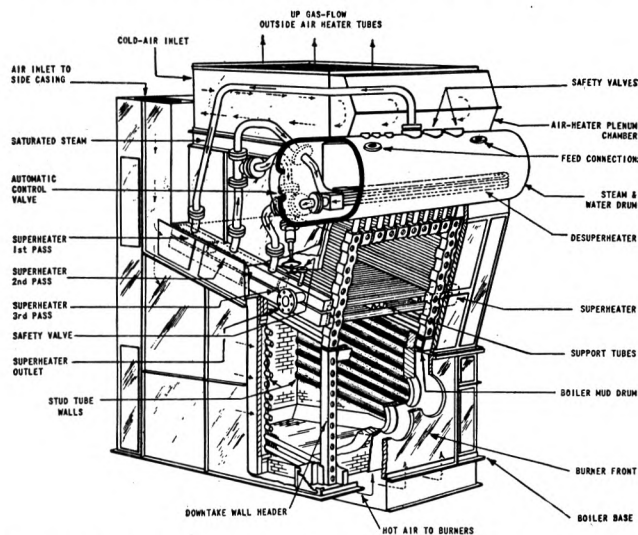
SINGLE-PASS STRAIGHT-TUBE HEADER-TYPE BOILER USED ON S.S. *J. W. Van Dyke
